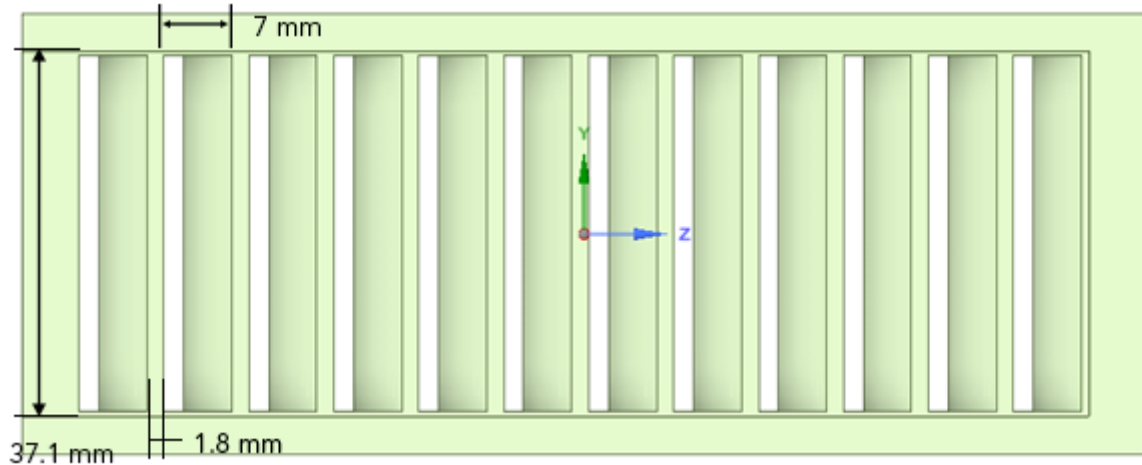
Dimensions for the Louvers shaped outlet hole pattern.
